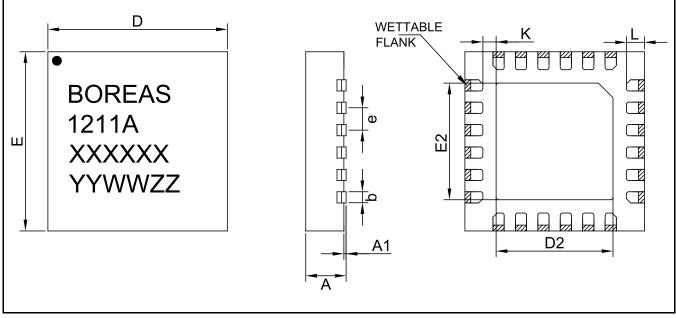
QFN 24L 4.0mm x 4.0mm package outline drawing
